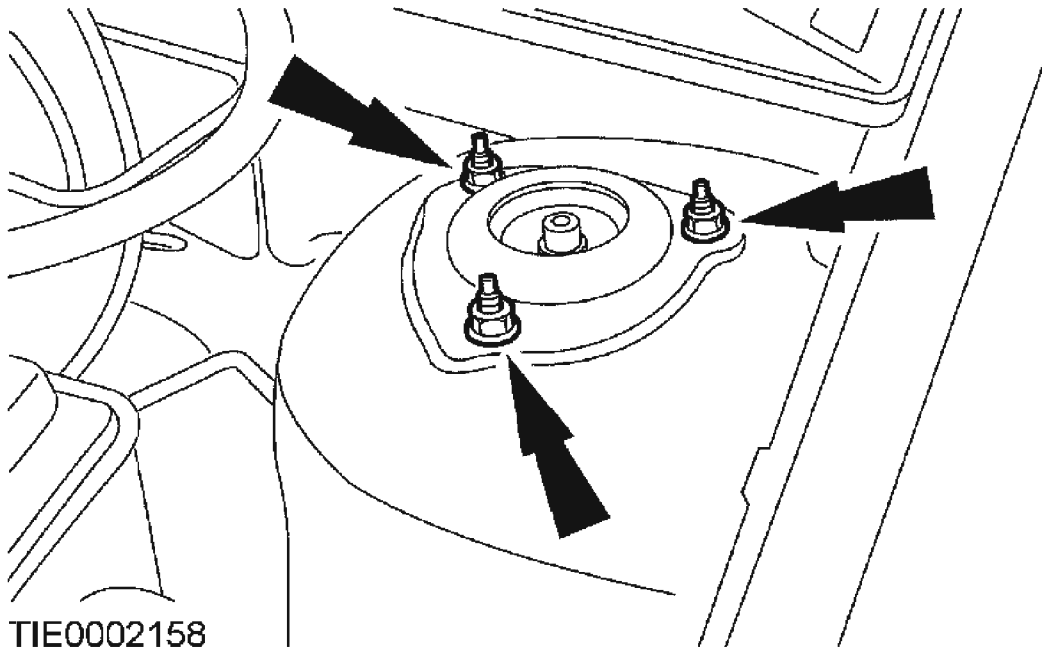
Loosening LH Strut And Spring Assembly Top Mount Nuts By Four Turns
